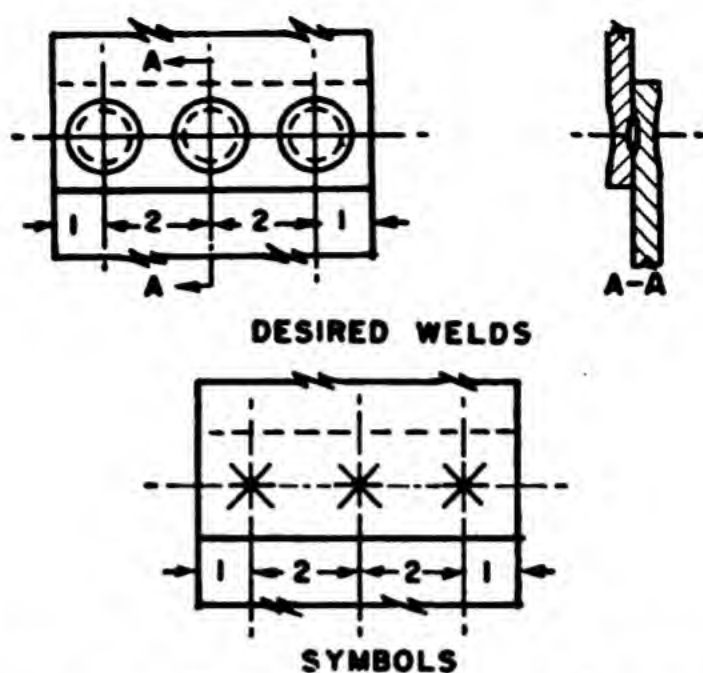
Pitch of spot welds with symbols on drawing.
